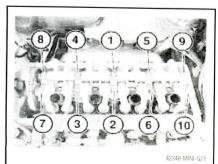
Showing rocker arm shaft bolt removal and tightening sequence—Cooper Coupe
